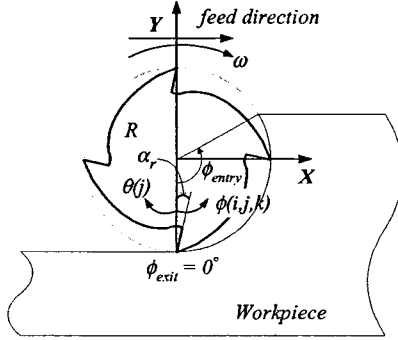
Cutter rotation angle and cutting edge location angle on a cross section of an end mill cutter
